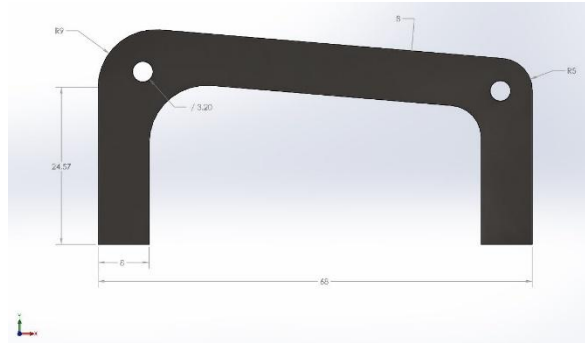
d) Side-view of the fuselage housing bracket with dimensions.
